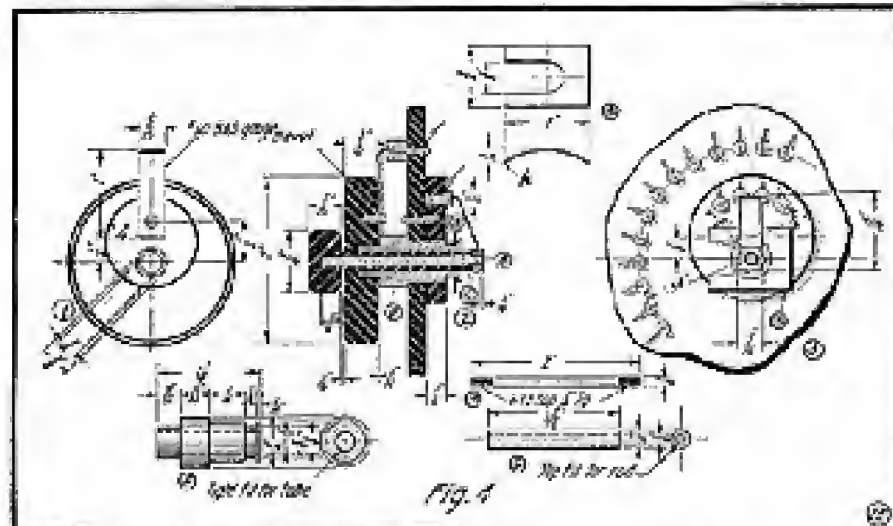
Parts Making Up "Primary" Switch of Condenser.
